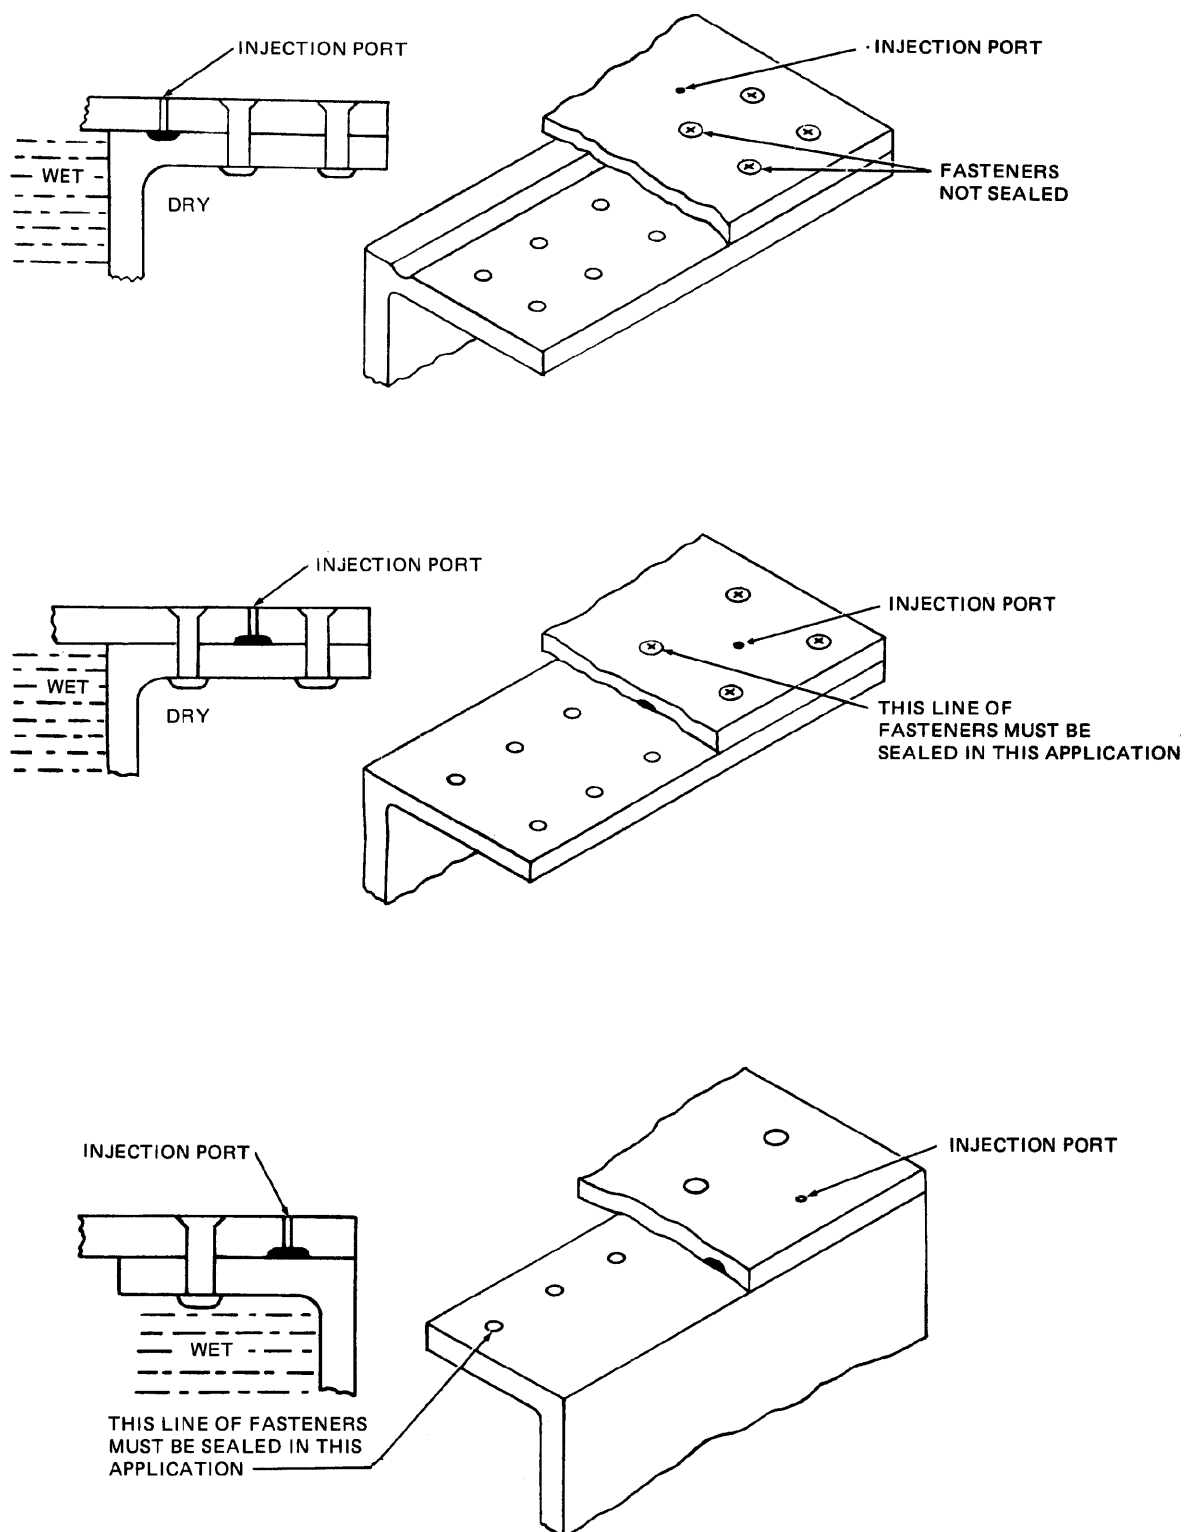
Typical Locations of Grooves/Channels (Sheet 1 of 2)
